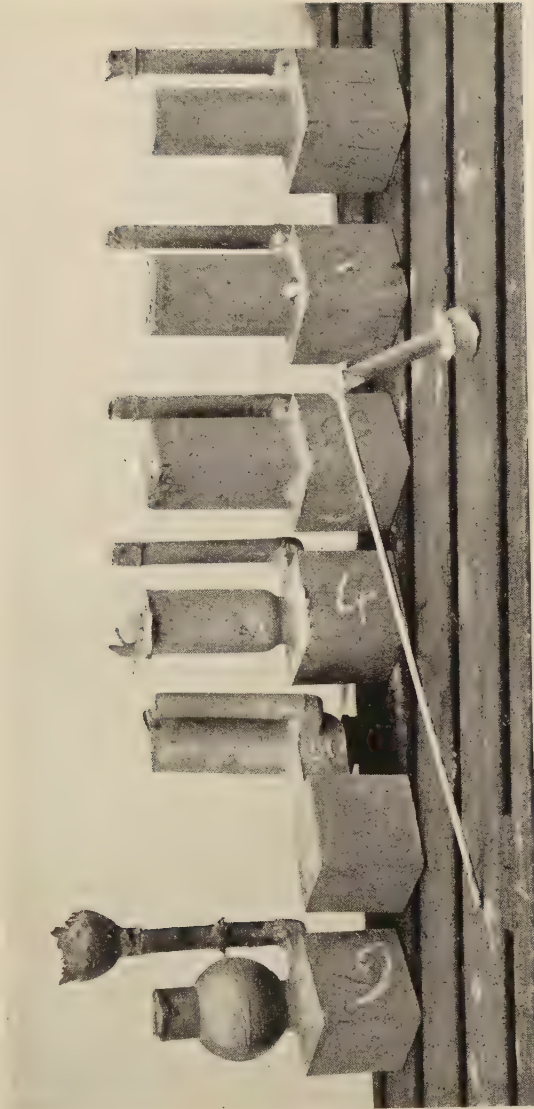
6-in. Cube Castings with Different Heads, as follows (reading from right to left): (1) Cylindrical, 4 in. dia. (2) Cylindrical, 5 in. dia. (3) Square, 4 in. side. (4) Cylindrical, 4 in. dia., reduced at bottom. (5) Cylindrical 4 in. dia., L-shaped. (6) Spherical, 6 in. dia., necked to 3 in. dia. at junction with cube.
